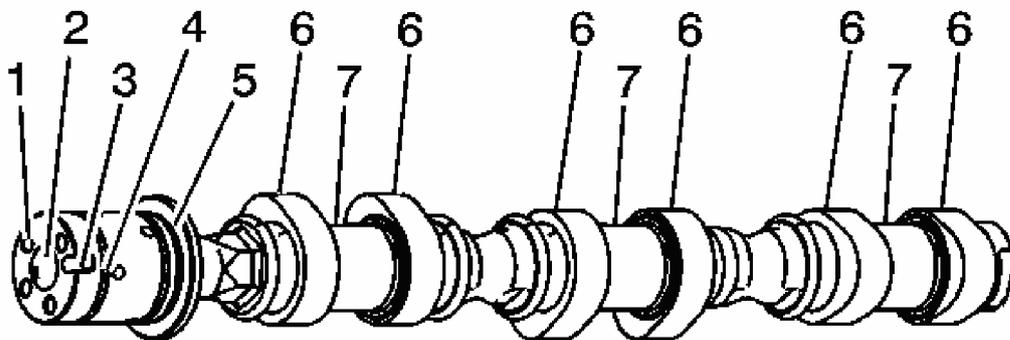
Identifying Camshaft Inspection Areas
